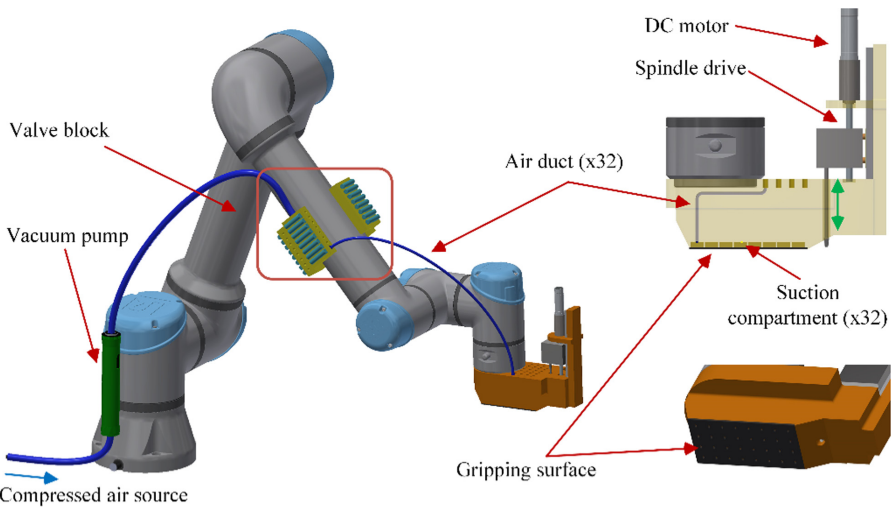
Design of the specific gripper. On the left, the gripper equipped on a UR5e; on top, right, gripper components are highlighted; on bottom, right, the interface surface is indicated.
